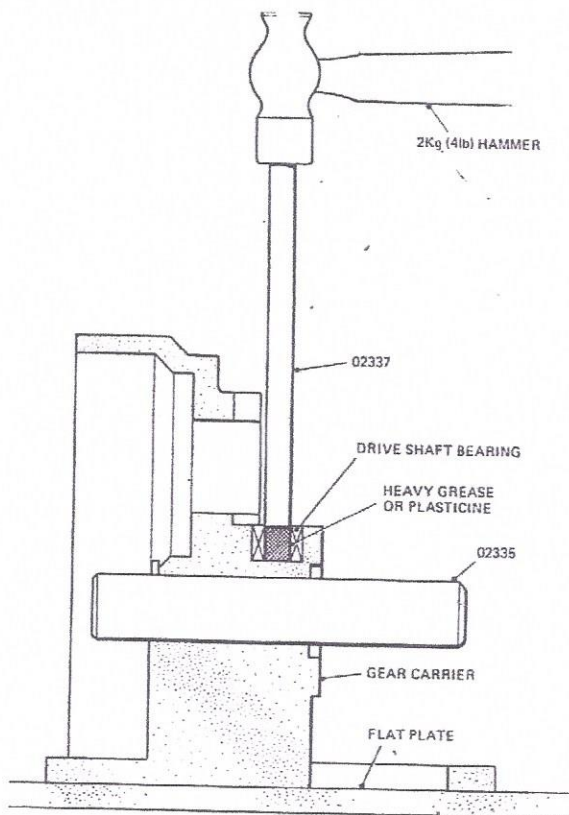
(a) Removal of the Drive Shaft Bearing from the Gear Carrier
